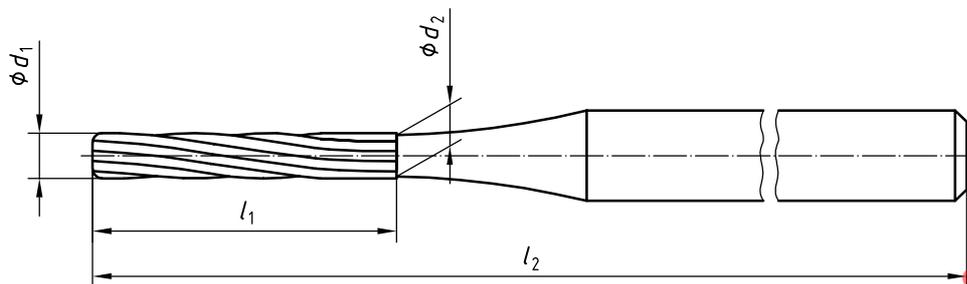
Cylindrical, rounded edge, head length 8 mm, carbide finishing burs
